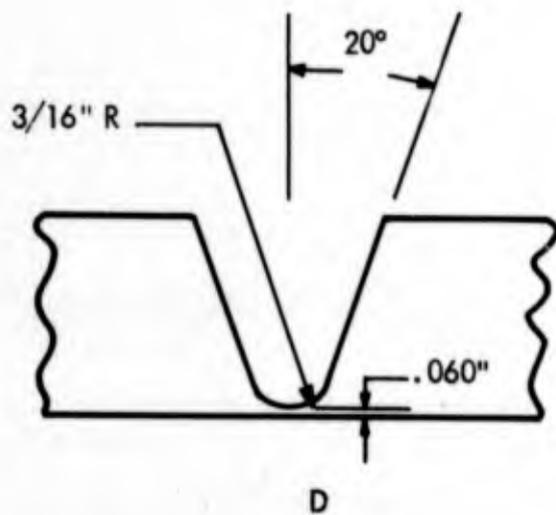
Weld Joint Designs for 1 Inch Plate.
